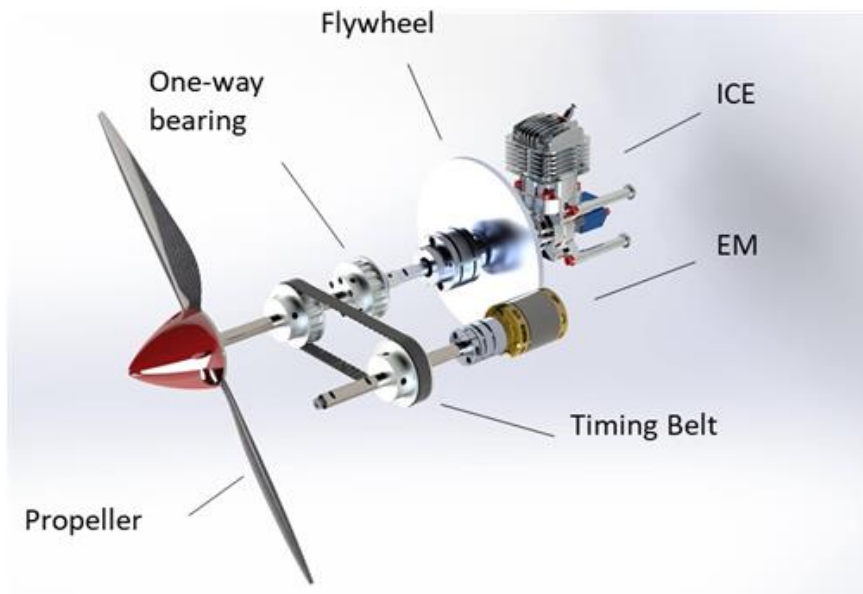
Detailed view of the parallel hybrid electric test bench CAD.
